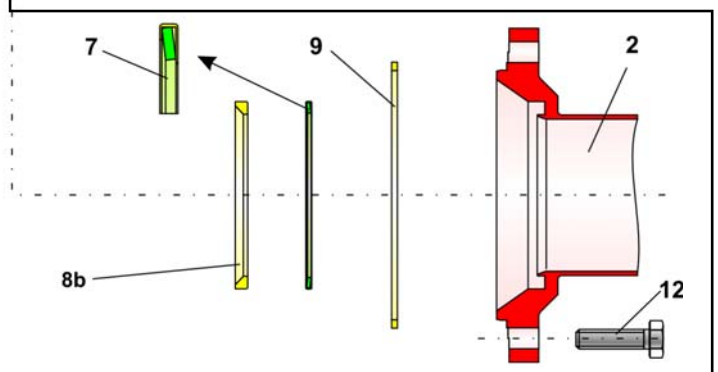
Explosion drawing of the pigging ball valve DN 150
